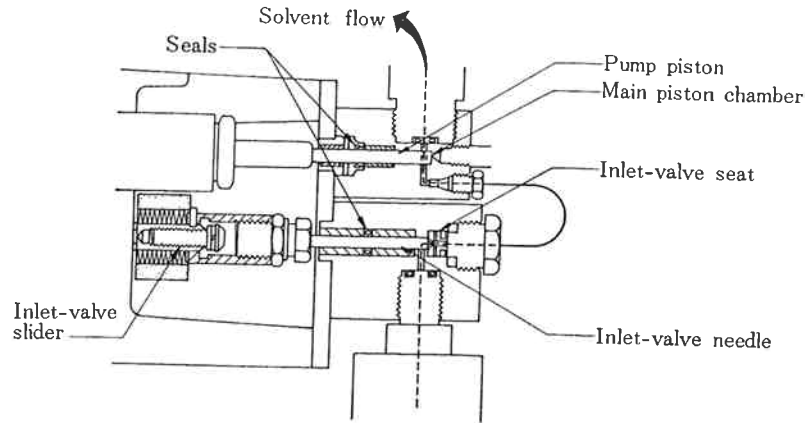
Cutaway view of pump, including detail of pump and inlet-valve heads
